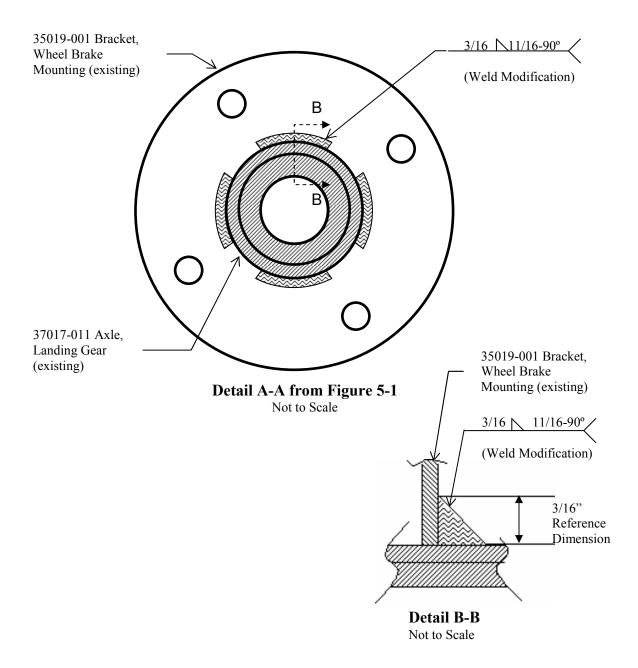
Weld Detail for Axle and Bracket
